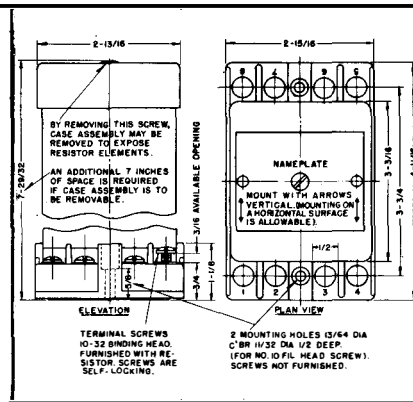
Outline Dimensions and Drilling Plan for VR-825 External Resistor.
